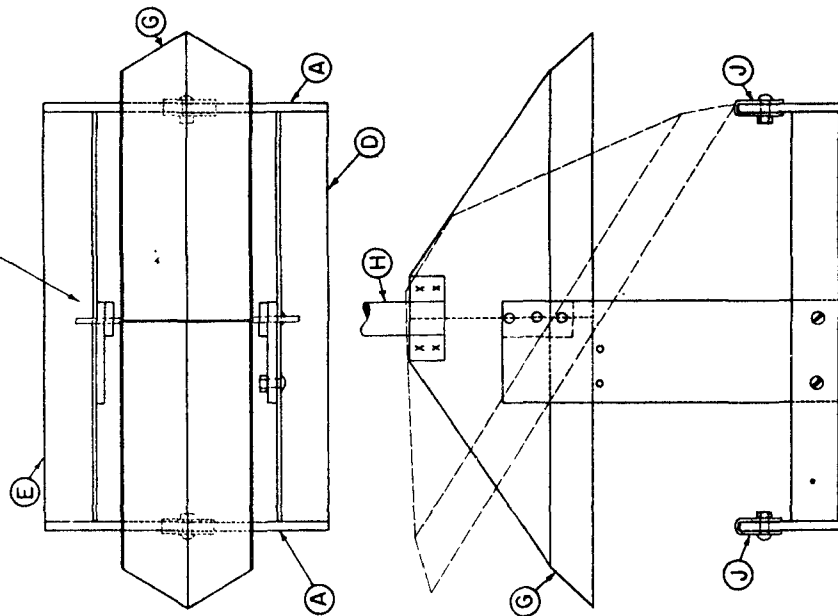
Top and side views of tipping bucket and sample collector assembly.
